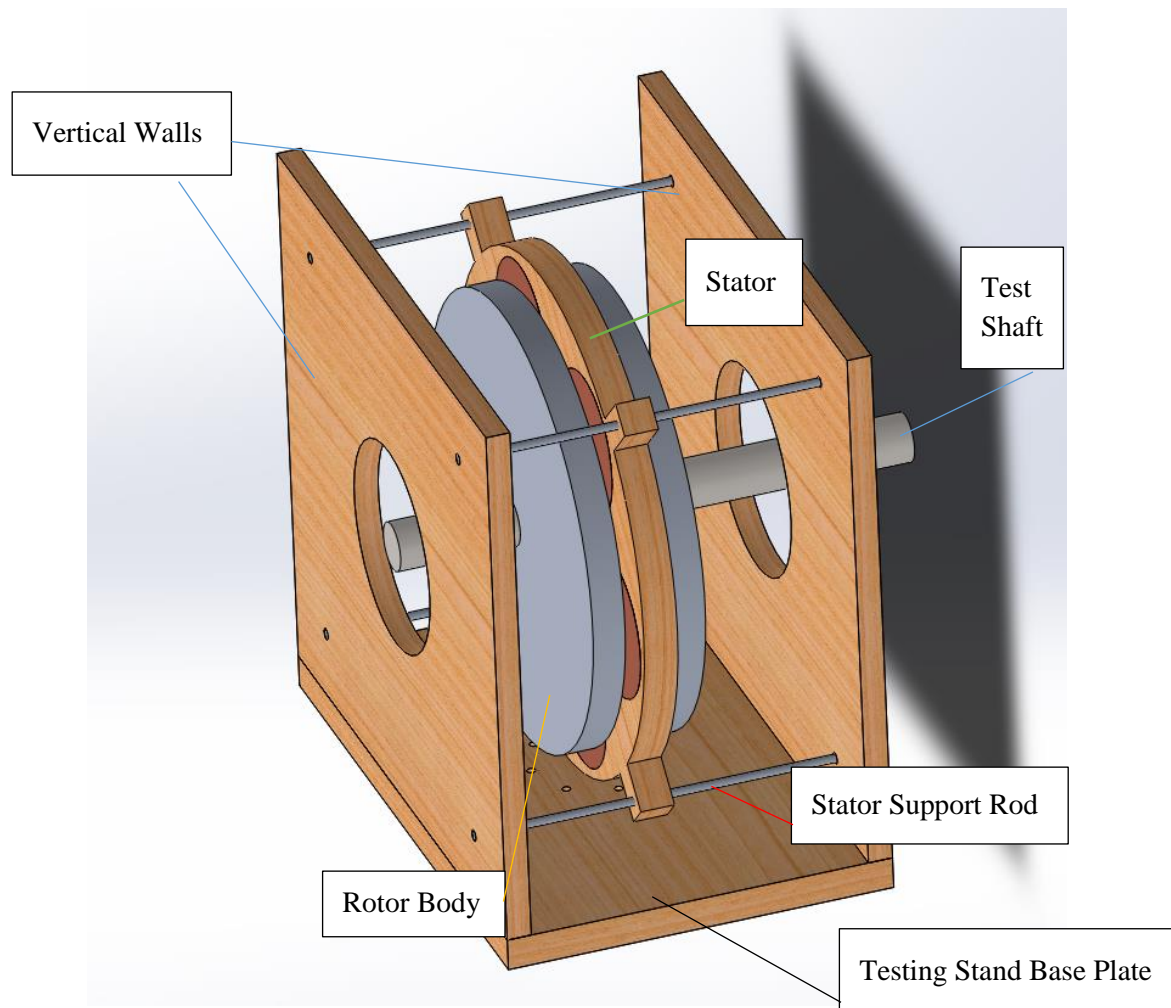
Isometric view of generator stage and testing stand assembly. Hidden components: rotor disks, rotor separator tube. Created with SolidWorks.
